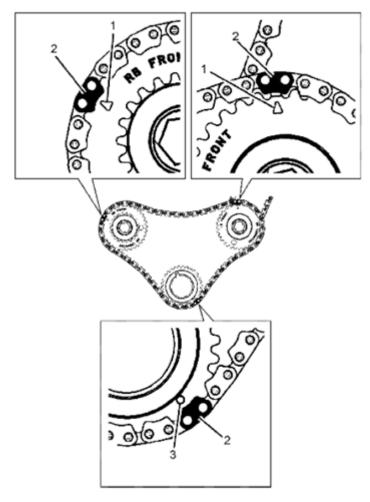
Identifying Timing Chain Mark Location Courtesy of SUZUKI OF AMERICA CORP.
